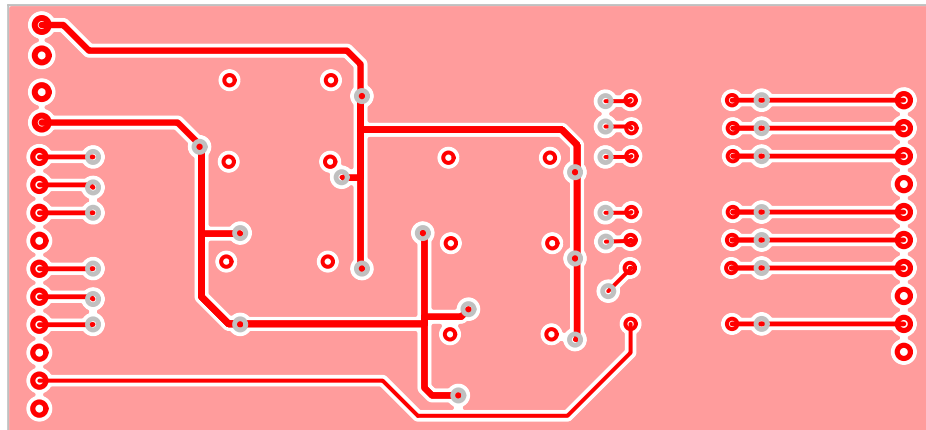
Current and DC-voltage measurement buffer and filter board layout bottom view.
